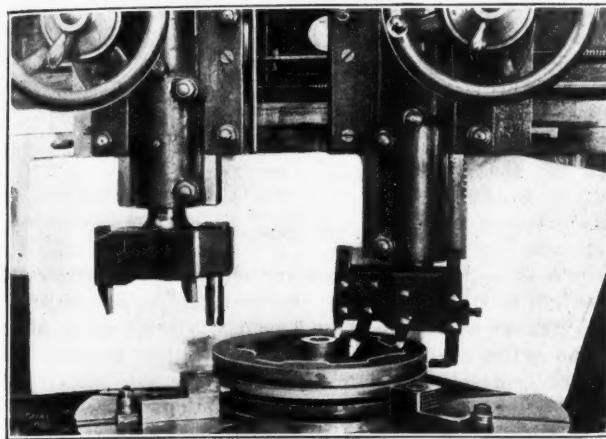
Tools in Position for Facing, and Turning Packing Groove.
